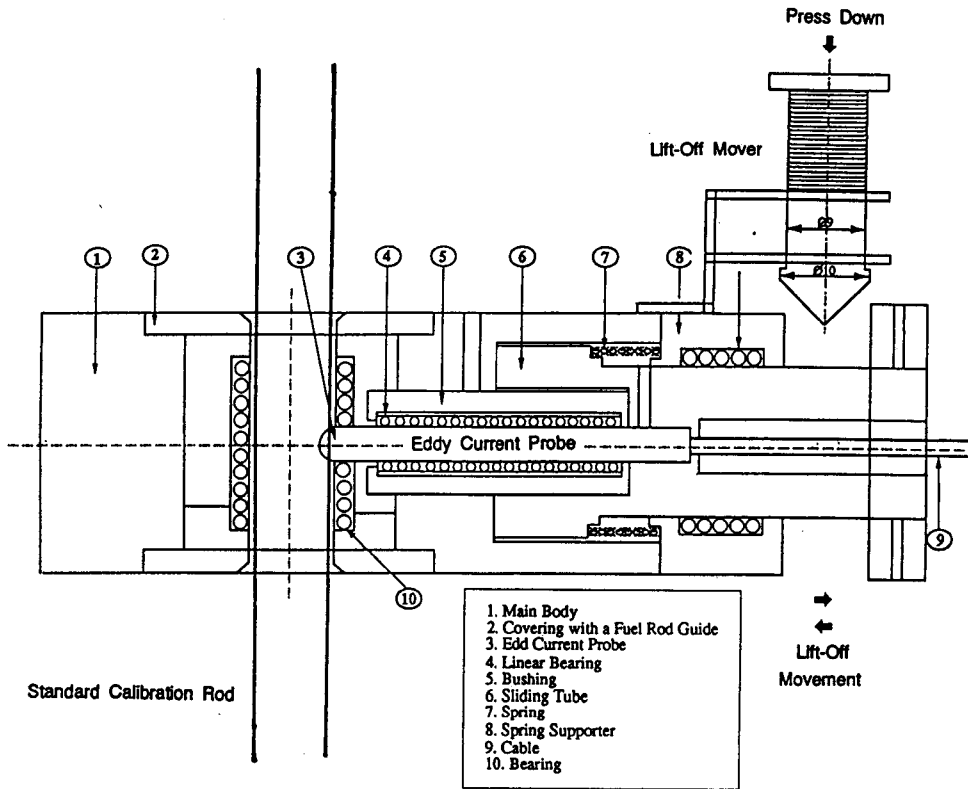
Schematic Drawing of the Oxide Layer Thickness Measuring Device Assembled with the Component Parts.
